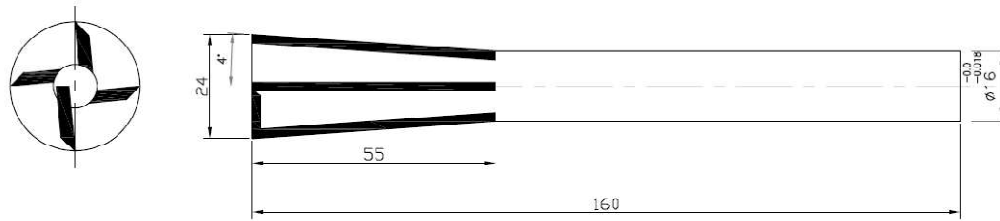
Reverse Taper profile (Carbide brazed) end mill
